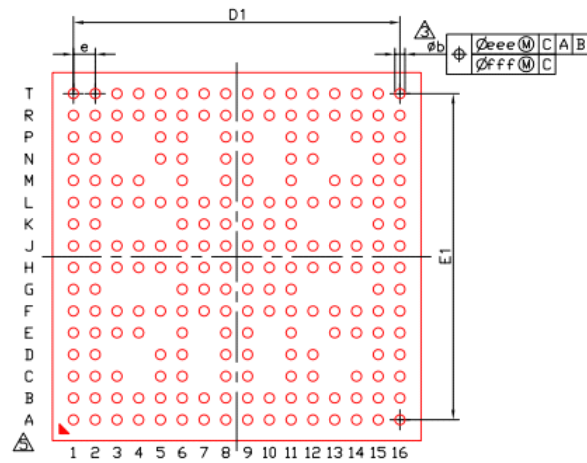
RK618 TFBGA(HF) Package Bottom View
